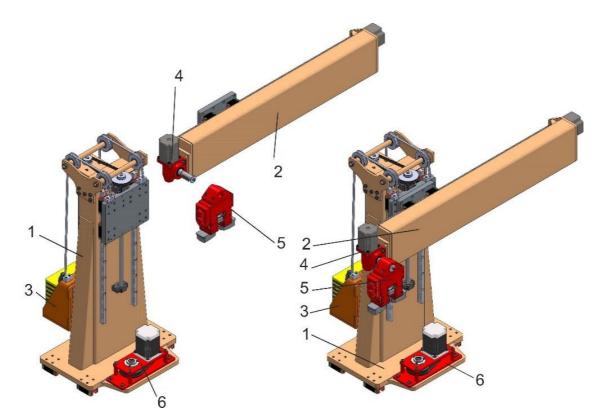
General view of the designed industrial robot: 1 - robot base (column); 2 - extendable manipulator arm; 3 - counterweight; 4 - drive for vertical rotation of the gripper; 5 - gripper; 6 - drive for horizontal movement of the mobile robot.
